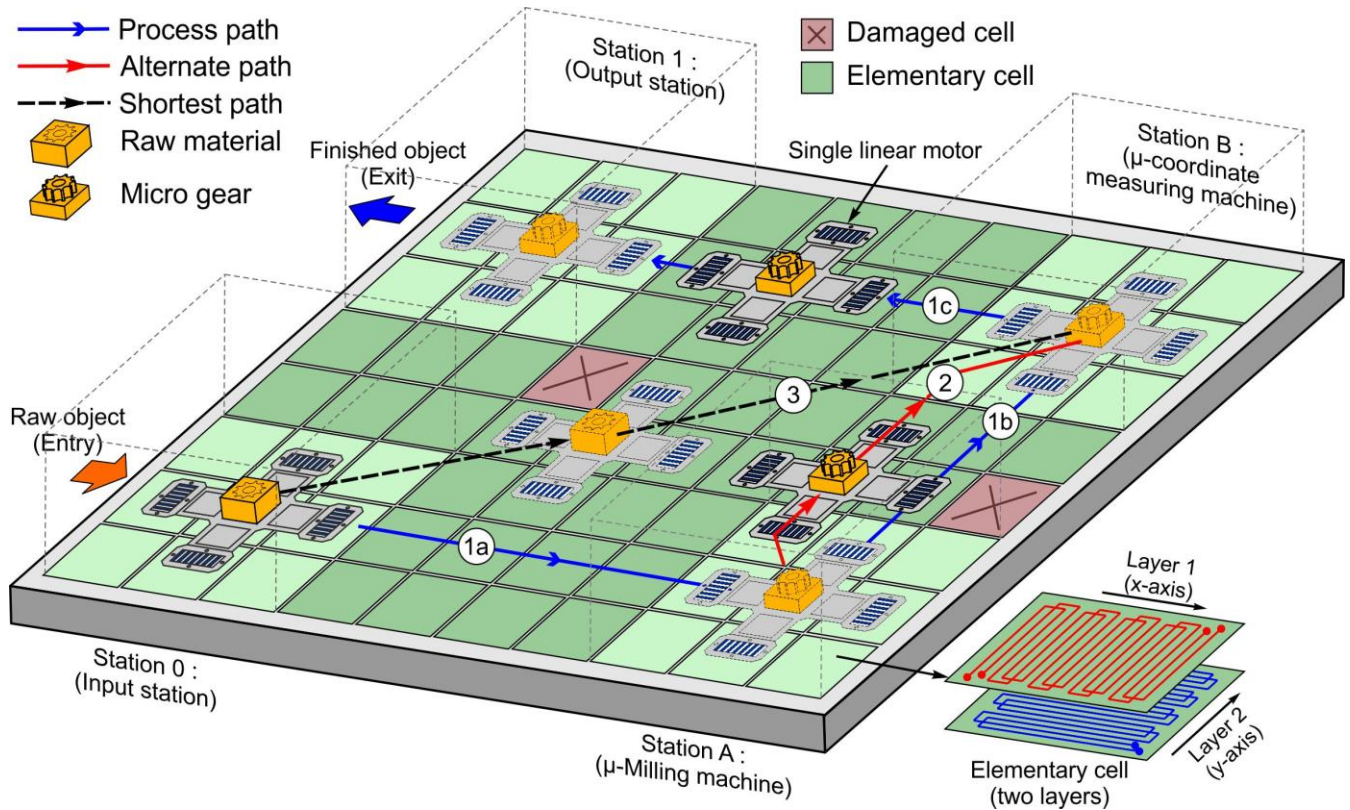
Flexible smart conveyor platform and its control mechanism.
